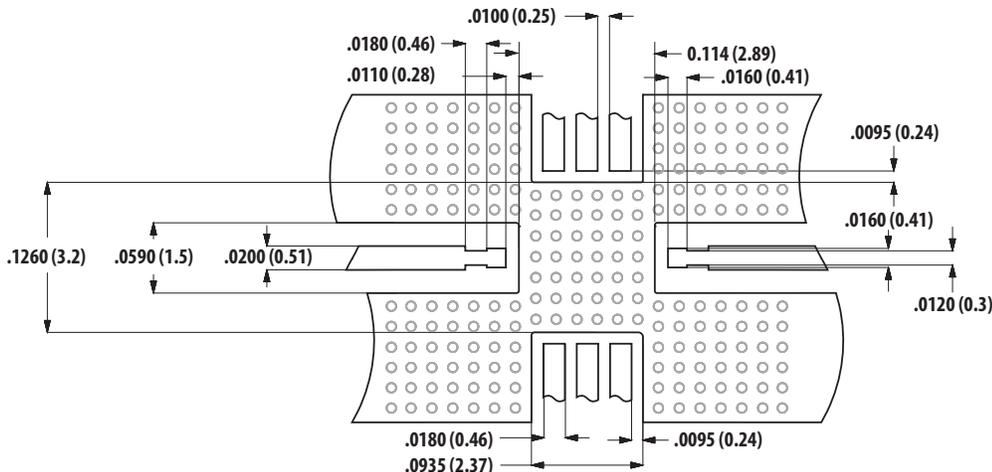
Recommended PCB Land Pattern for Rogers R04350, 0.010" thick. Dimensions are in inches [mm].
